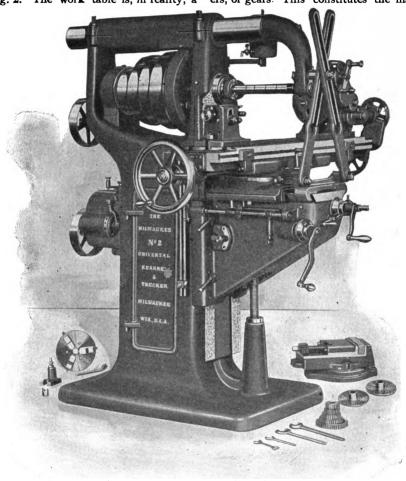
UNIVERSAL MILLING MACHINE.
